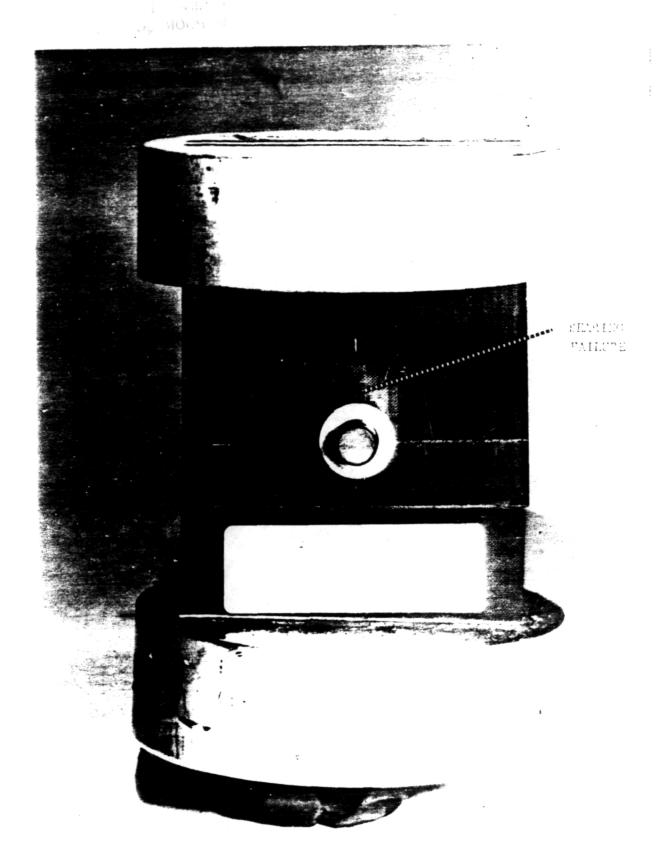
DOUBLE SHEAR COMPRESSION TEST - BEARING FAILURE
